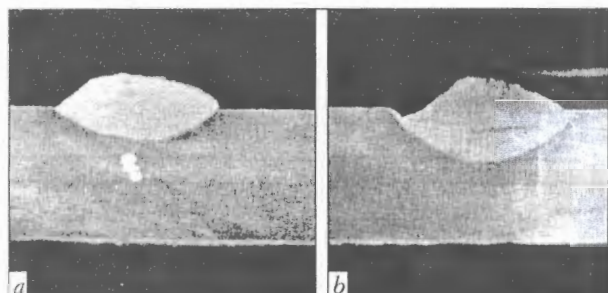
Transverse macrosections of the welds made by welding at a direct current (a) and with the pulsed arc (b)
